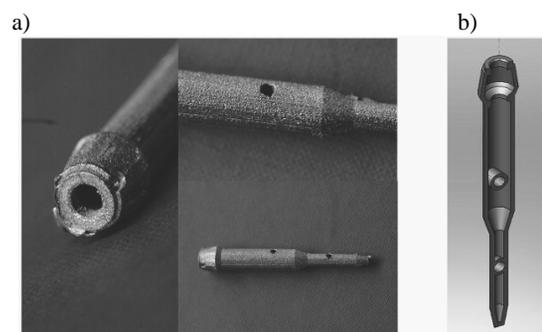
a) Hollow and thin walled (1 mm) LENS prototype, b) CAD model of LENS prototype
